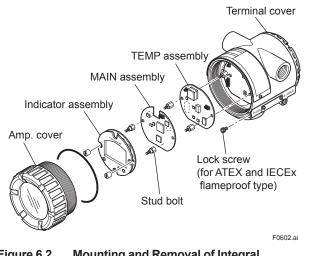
Mounting and Removal of Integral Indicator Assembly
